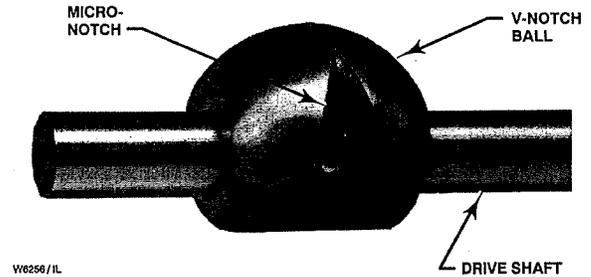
Typical Metal Micro-Notch™ Ball and Drive Shaft
